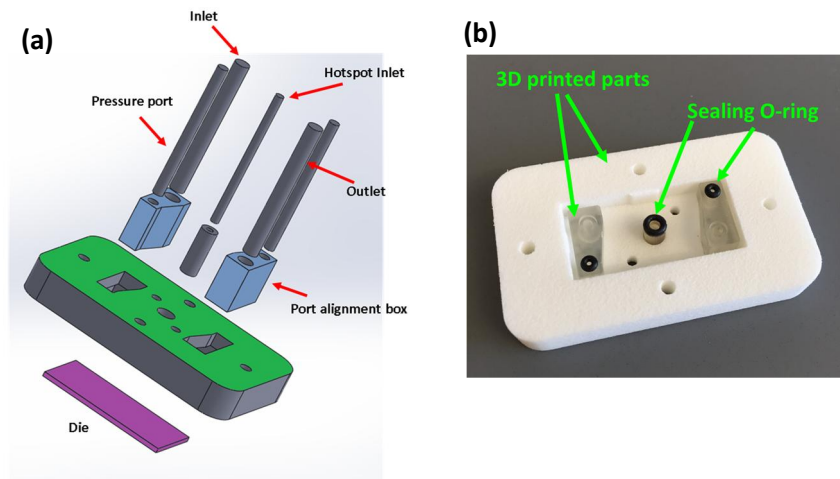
(a) 3D design of the fluid ports illustrating the package encapsulation and assembly. (b) 3D printed fluid ports using SLA 3D printing technology
